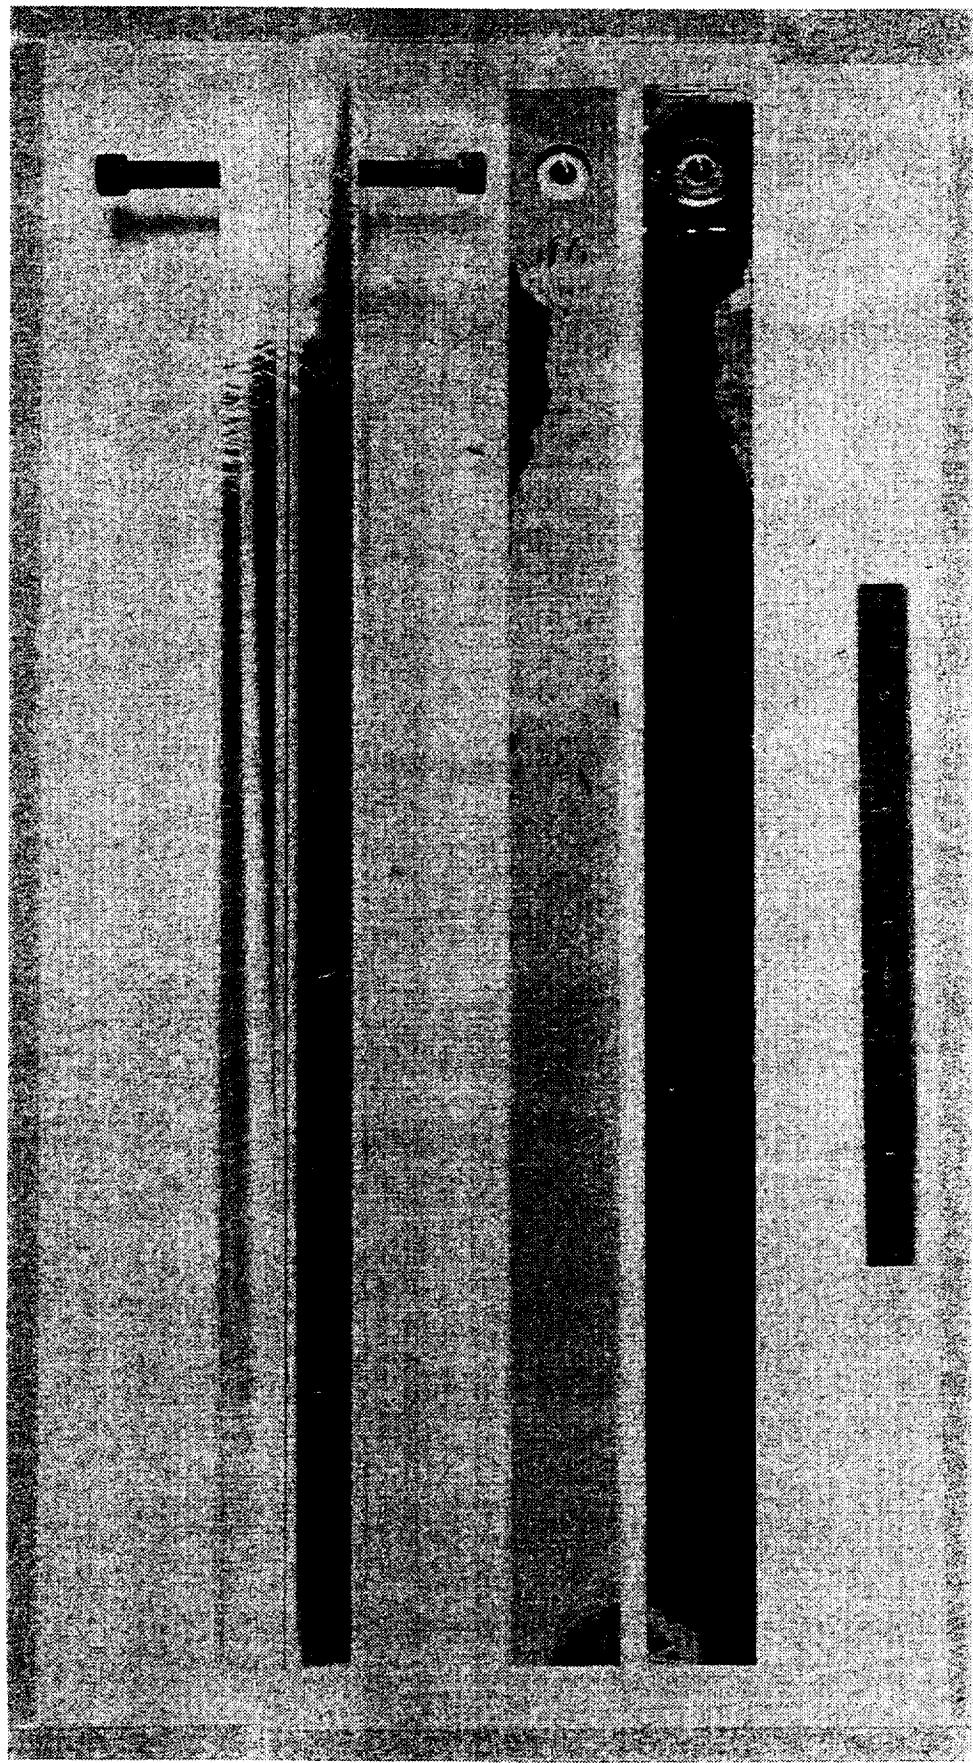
Photograph of Fracture Surfaces of Selected Double Cantilever Beam Test Specimens, Mode I Loading
